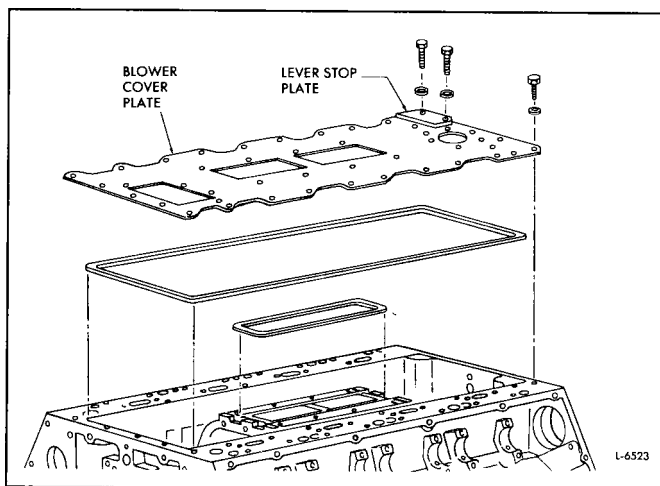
Bypass Blower Valve Lever Stop Plate Location
